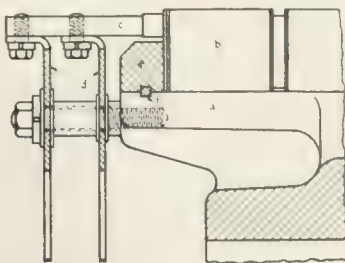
PARTIAL VIEW OF SECONDARY OF TYPE MS MOTOR, SHOWING CONSTRUCTION OF WINDING
